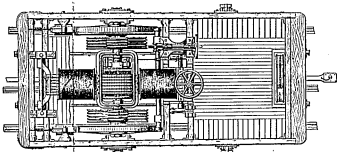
PLAN VIEW OF THE ELECTRIC MOTOR.
